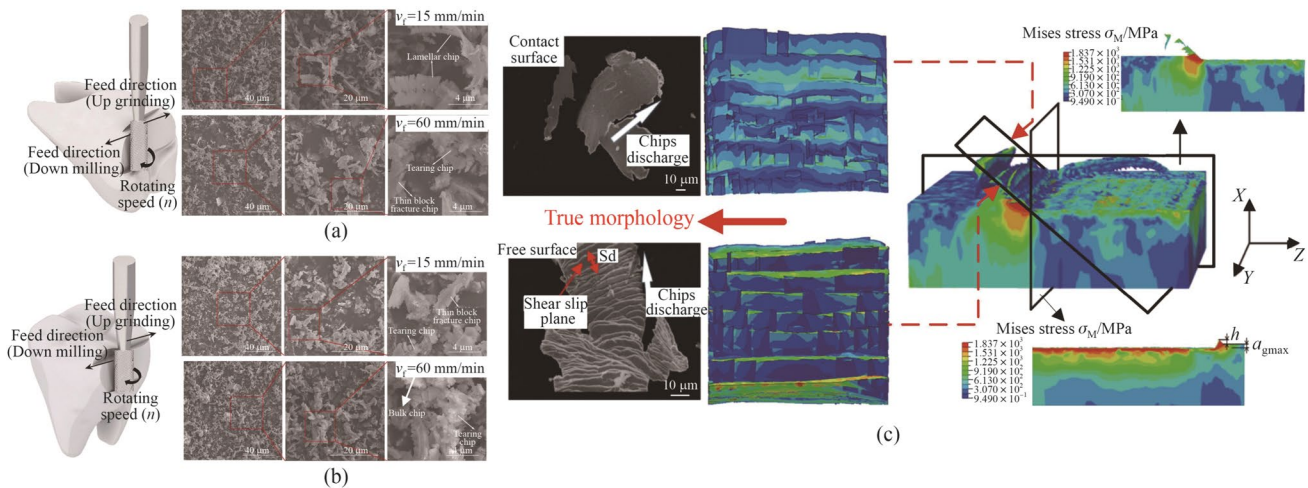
Chip morphology of different workpiece materials after HSG a enamel surface grinding of occlusal surfaces and chip shape of occlusal surface grinding [86], b buccal/lingual enamel surface
